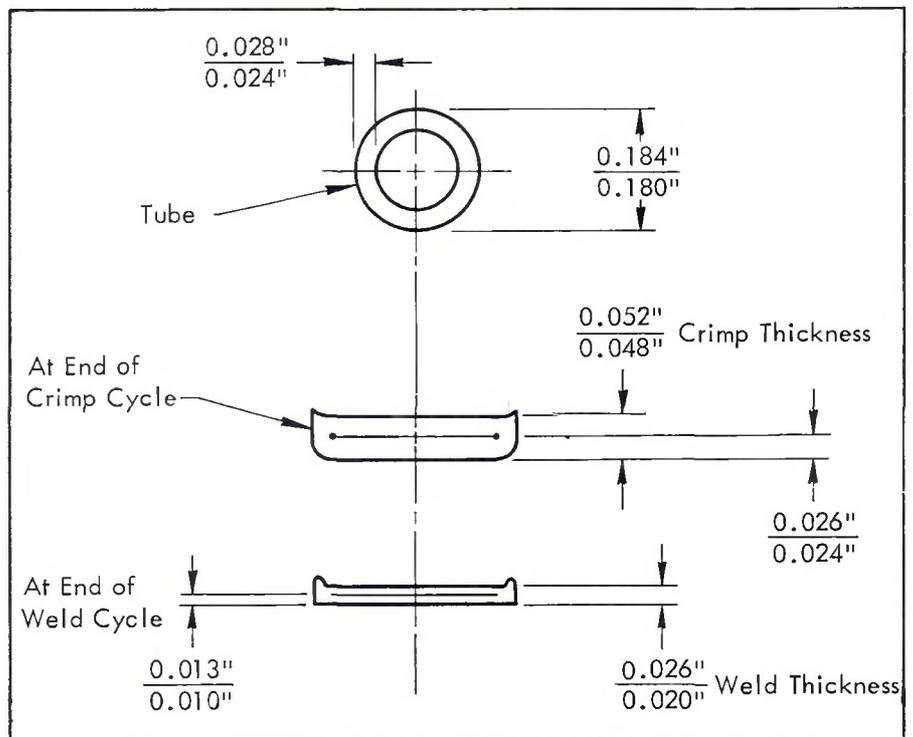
Optimum dimensions for ultrasonically crimp welding aluminum tubes
